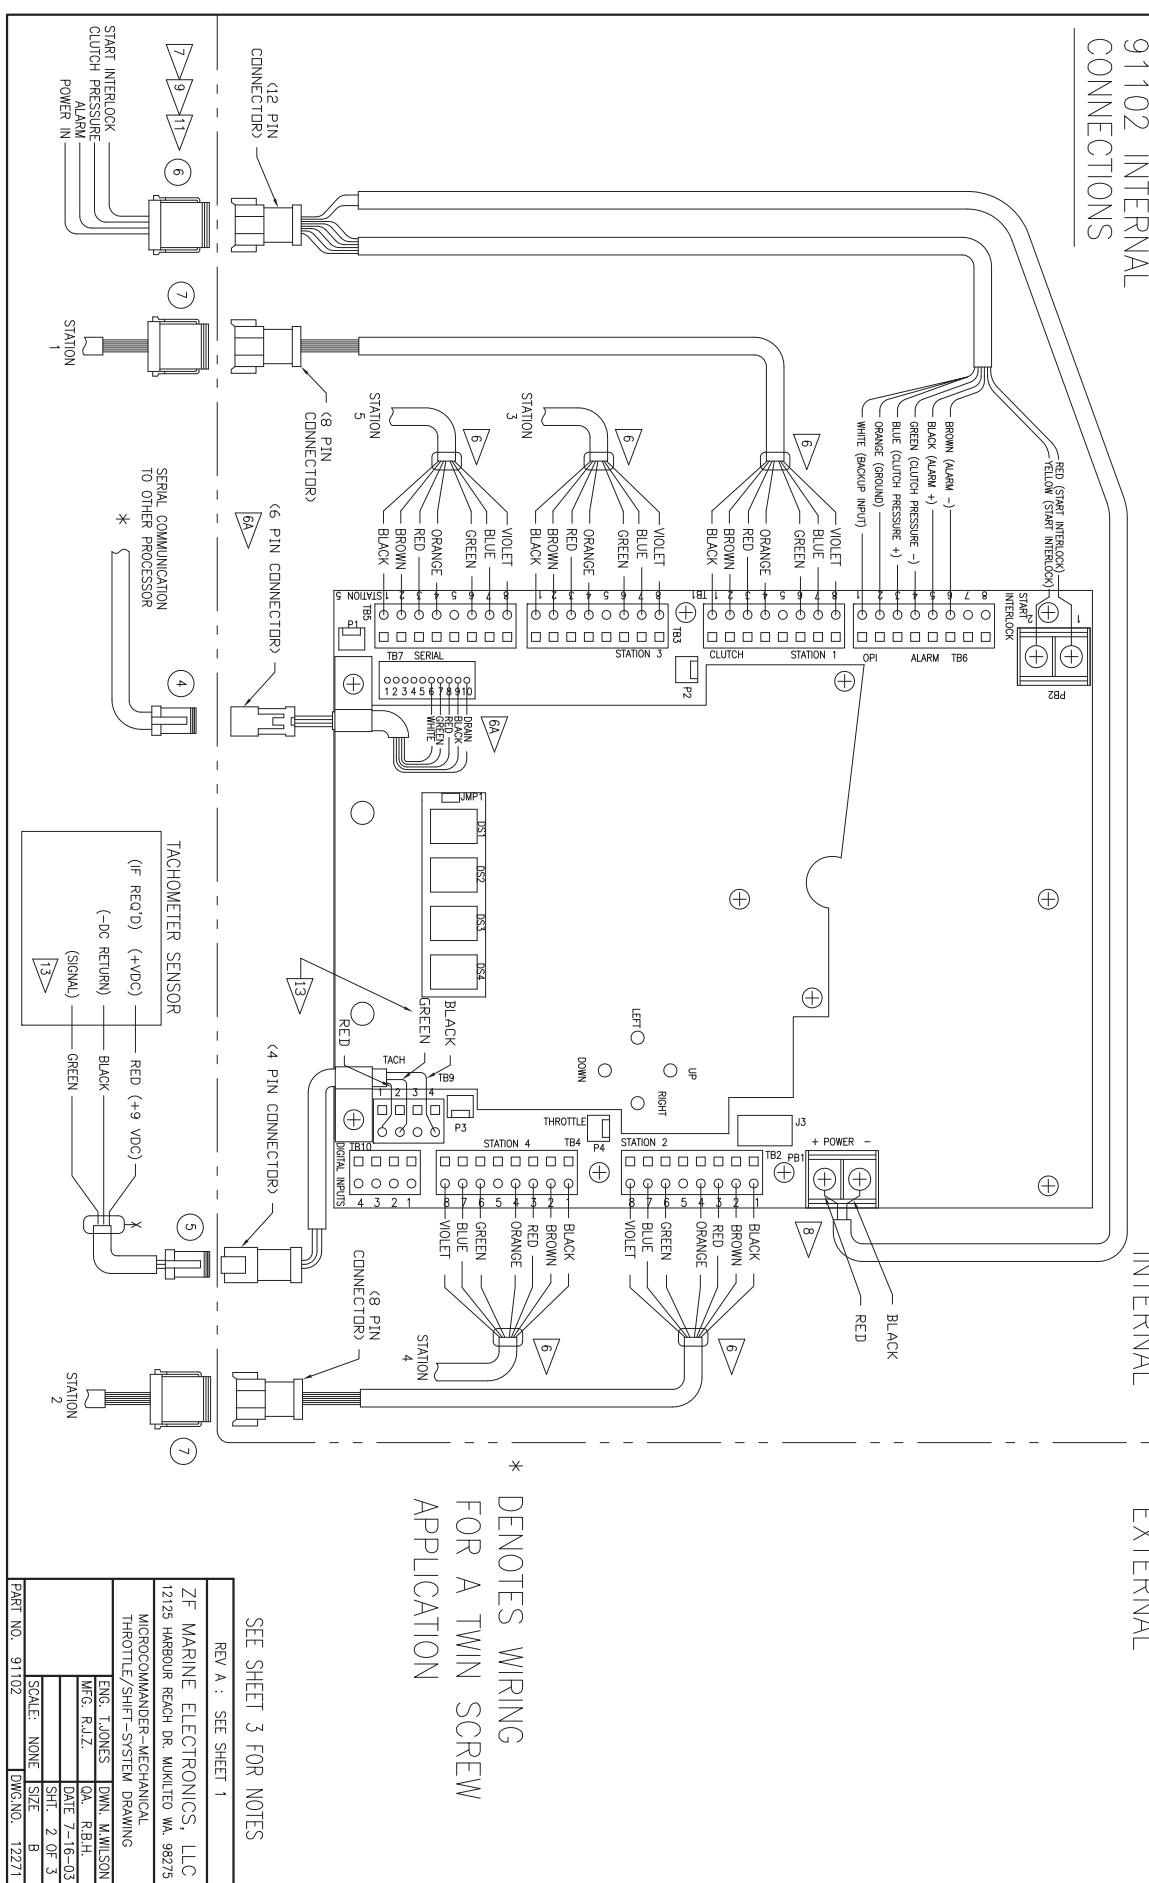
MicroCommander - Mechanical Throttle / Shift
